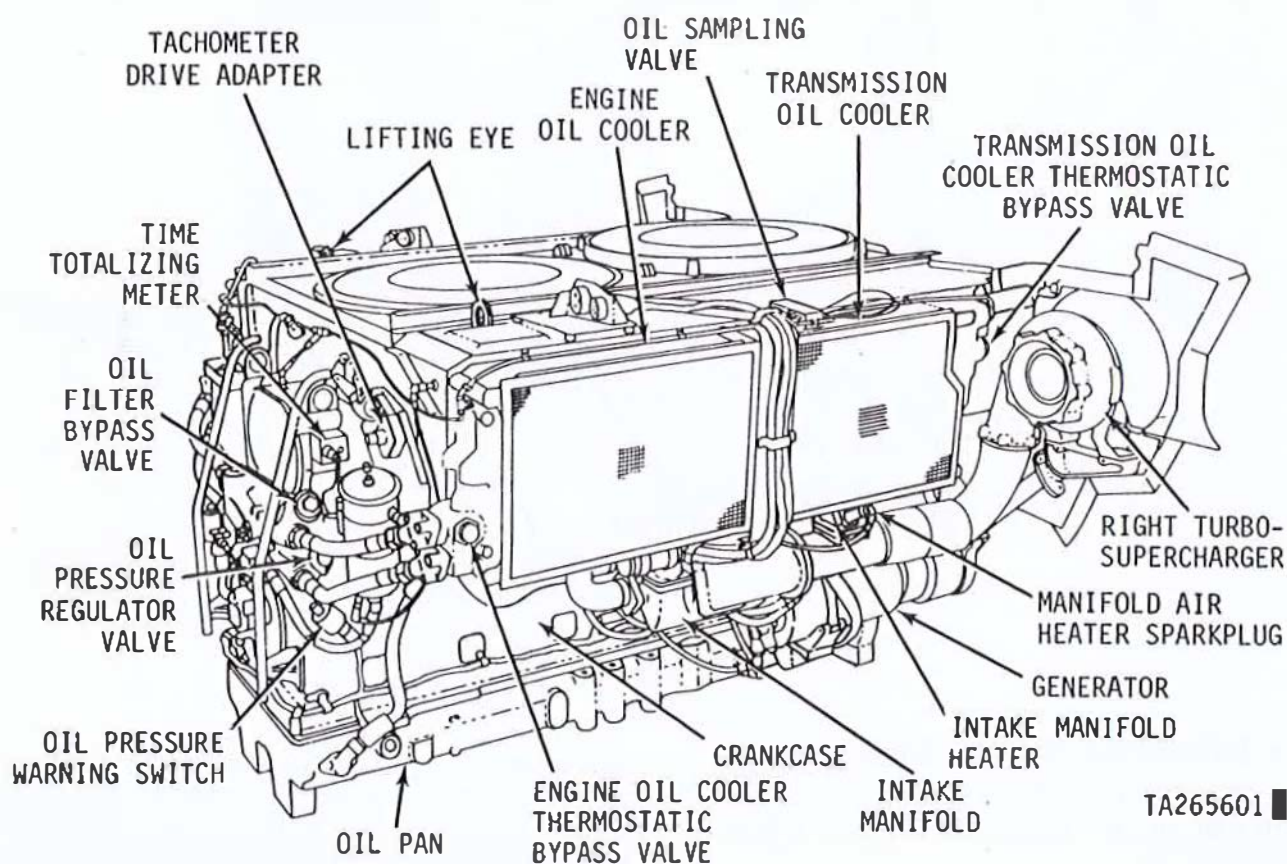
AVDS-1790-2C engine assembly — right front view.
